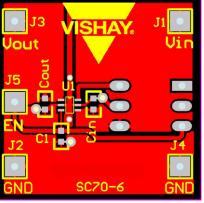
Top, PCB Layout for SC70-6 (board size: 1 inch x 1 inch)
